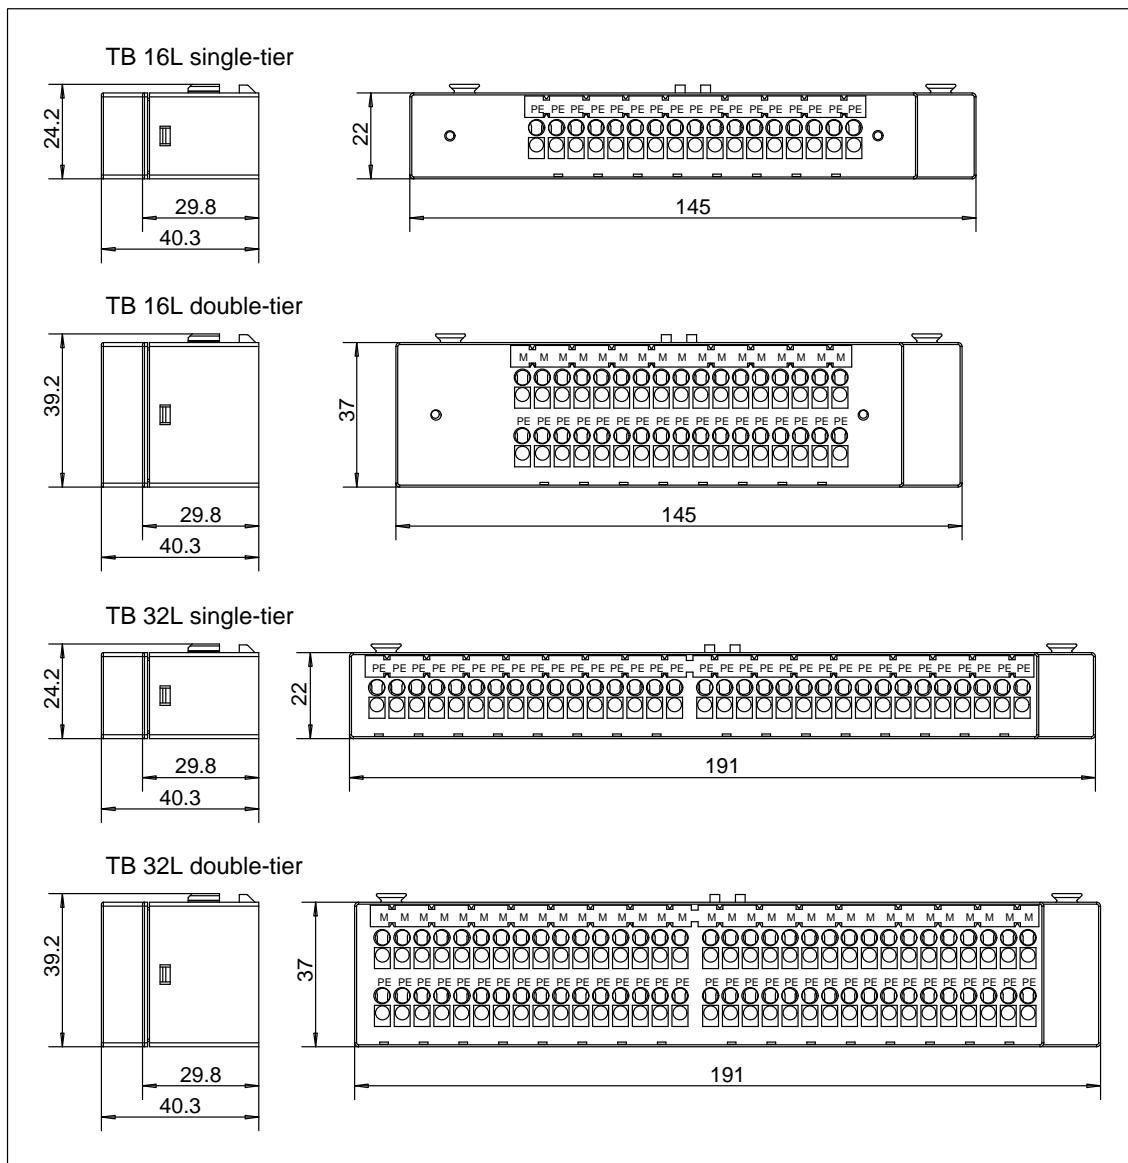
TB 16L/TB 32L Supplementary Terminals, Dimension Drawing
